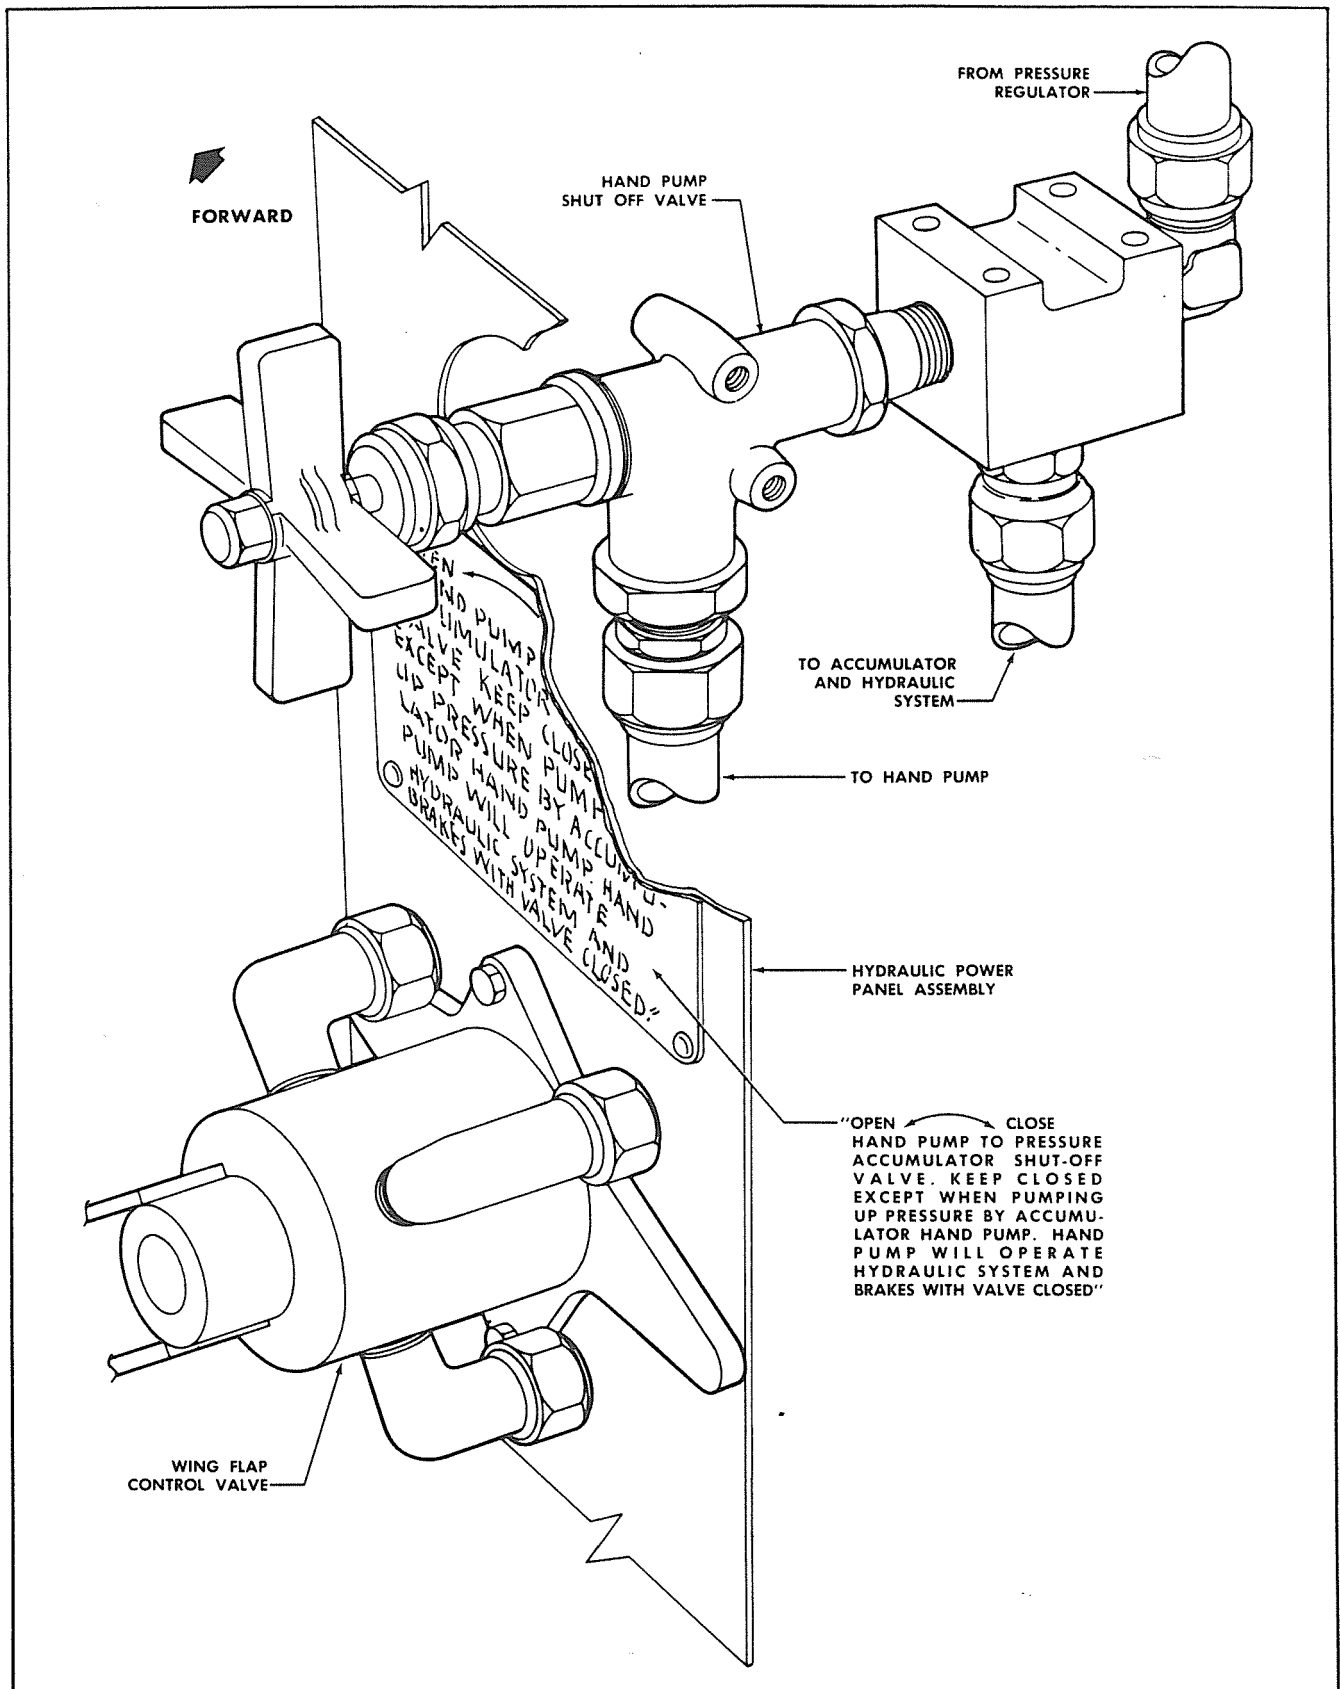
Hydraulic System Hand Pump Shutoff Valve
